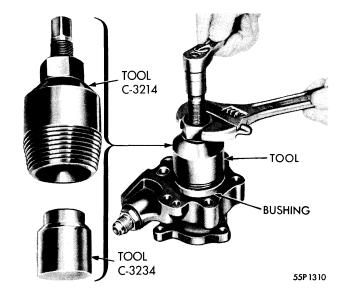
Removing Babbitt Bushing from Body Using Tool C-3214 and C-3234
